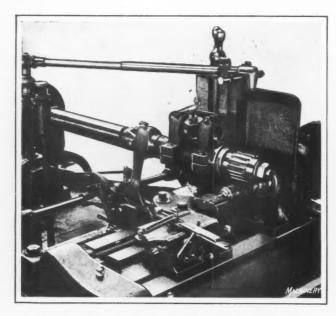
Hobbing a Stack of Thirty-five Water-meter Gears
